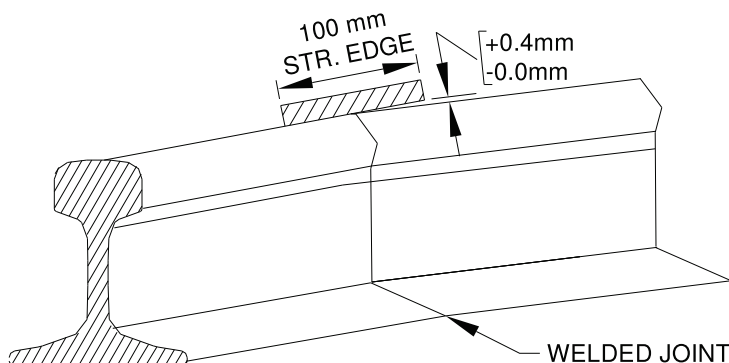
(d) Tolerance for Finishing Top Table Surface of Welded Joint
